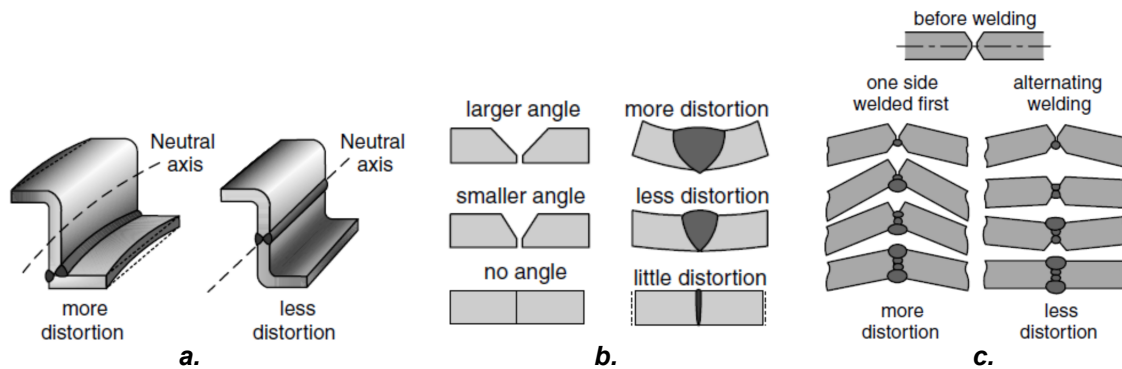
Techniques to reduce distortion by: a placing the weld in the neutral axis; b reducing volume of weld metal and using high penetration welding; c using double V joint and welding alternatively on each part of the chamfer [52] (adapted by Kou [53]).
